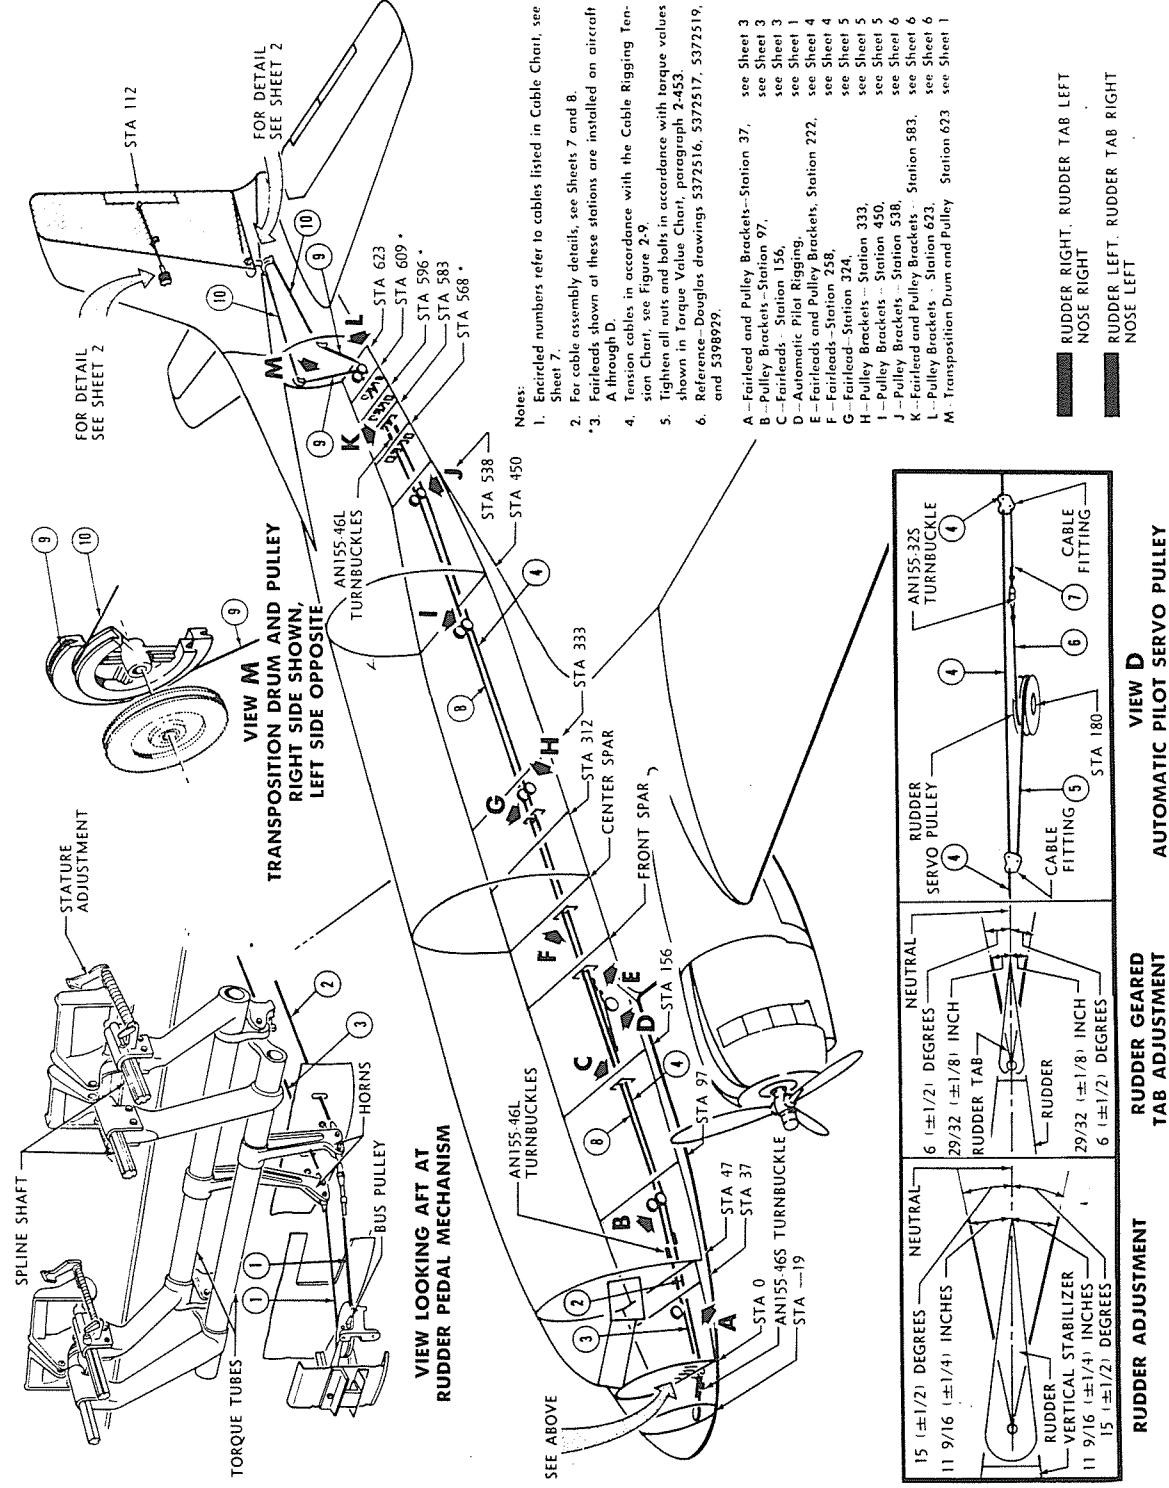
(Sheet 1 of 8 Sheets). Rudder and Rudder Geared Tab Control System - Key Drawing
